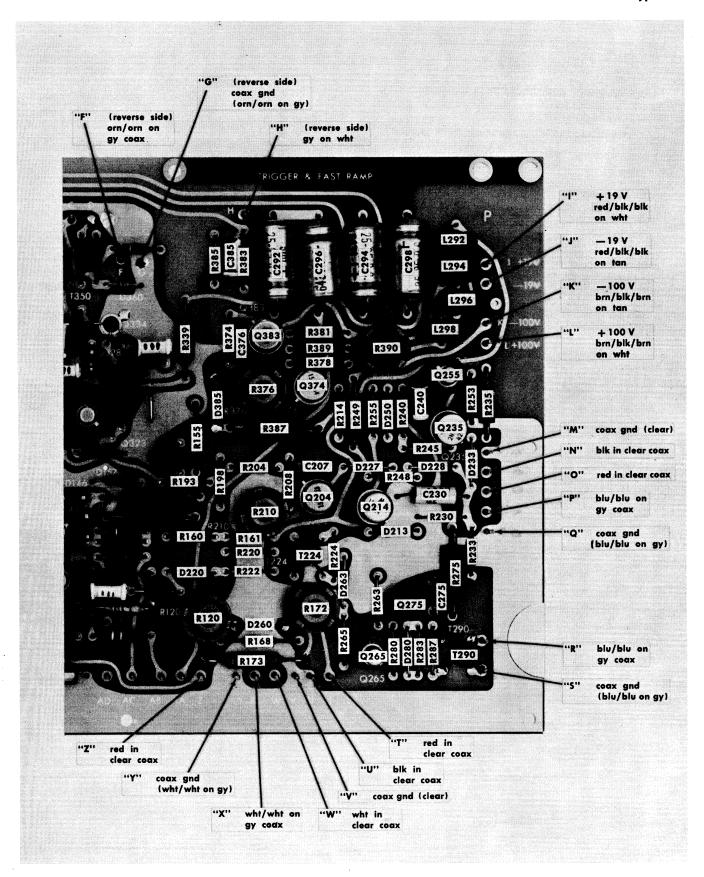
Circuit components and pin-connector wiring code on Trigger and Fast Ramp etched-wiring board (rear half).
